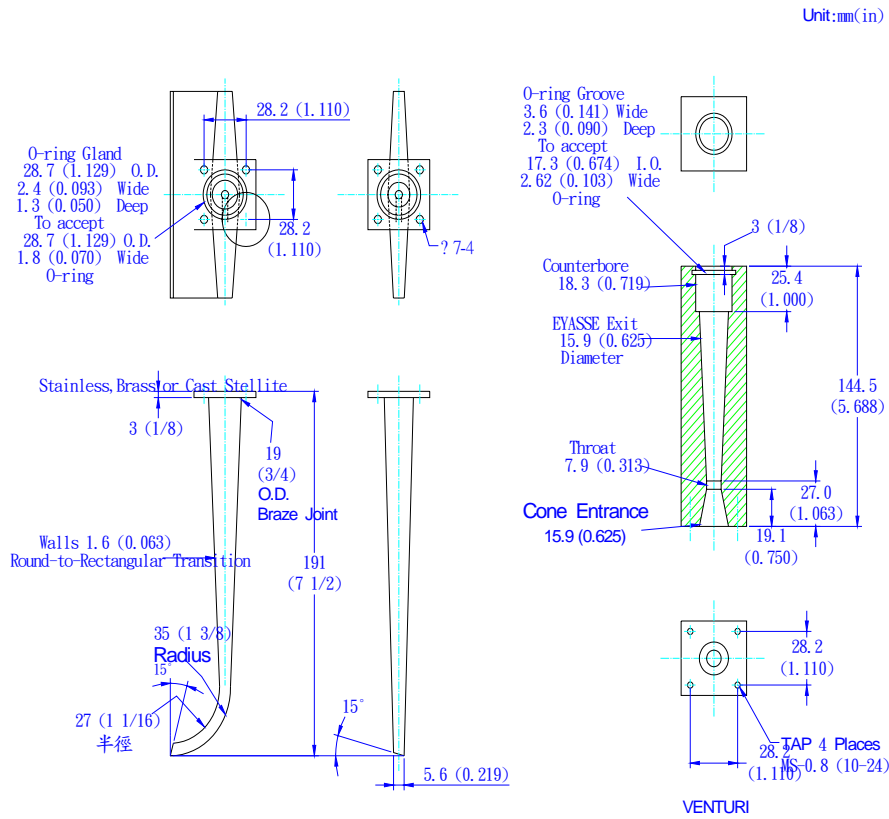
(b) Dust feeder ejector/venturi and pickup tube details
